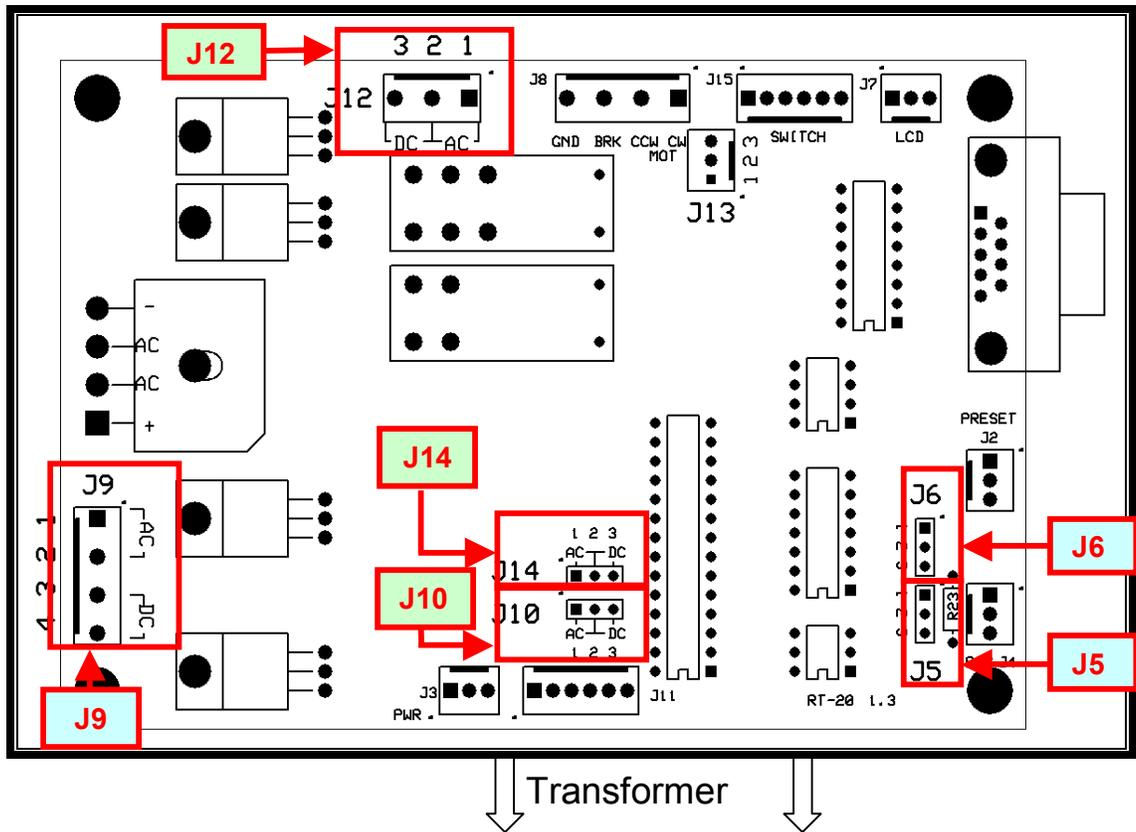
RT-20 PC Board Layout—Locations of Configuration Jumpers
